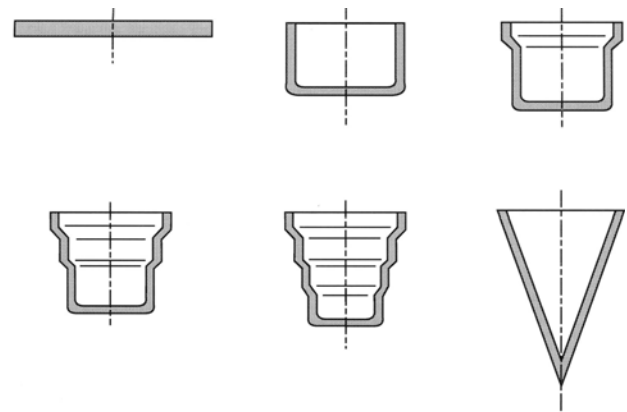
Liner produced by deep drawing in multiple steps from a plate.
